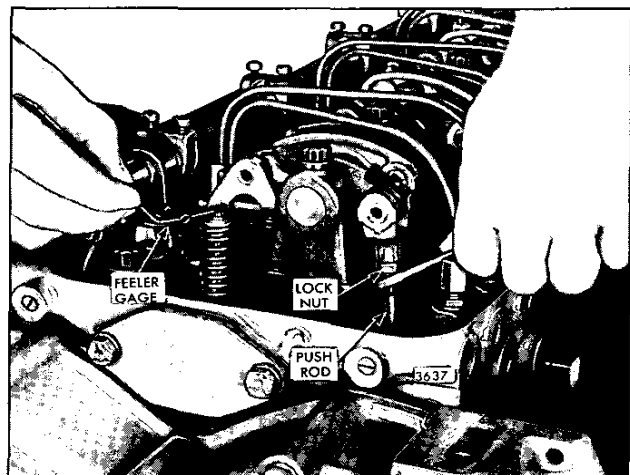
Adjusting Valve Clearance (Four Valve Head)
